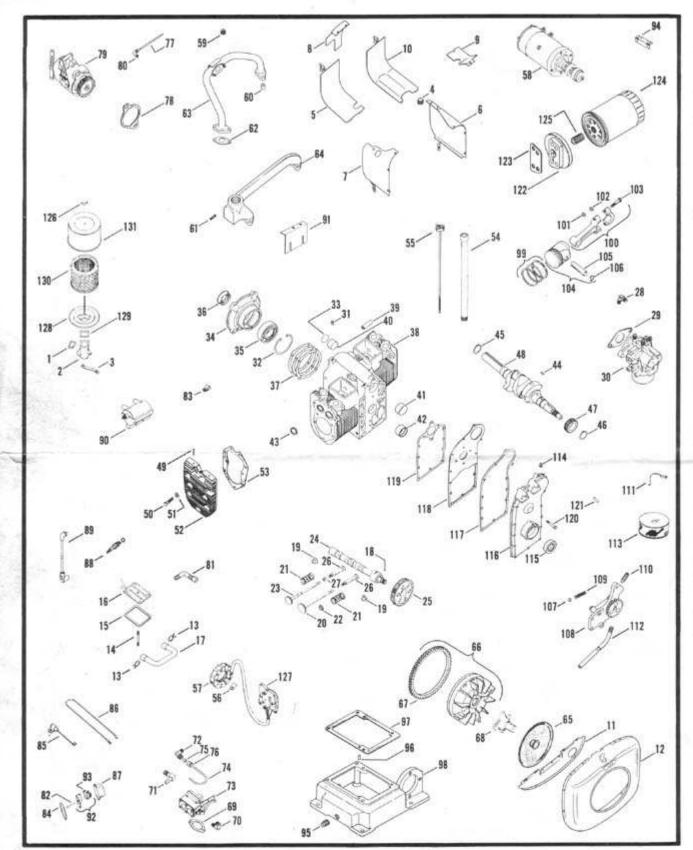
PARTS IDENTIFICATION - EXPLODED VIEW K482 ENGINE
